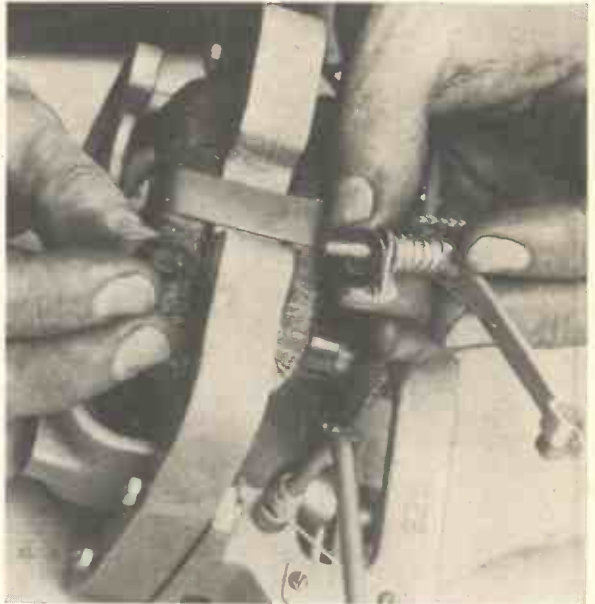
REMOVING BRUSH ASSEMBLY.
